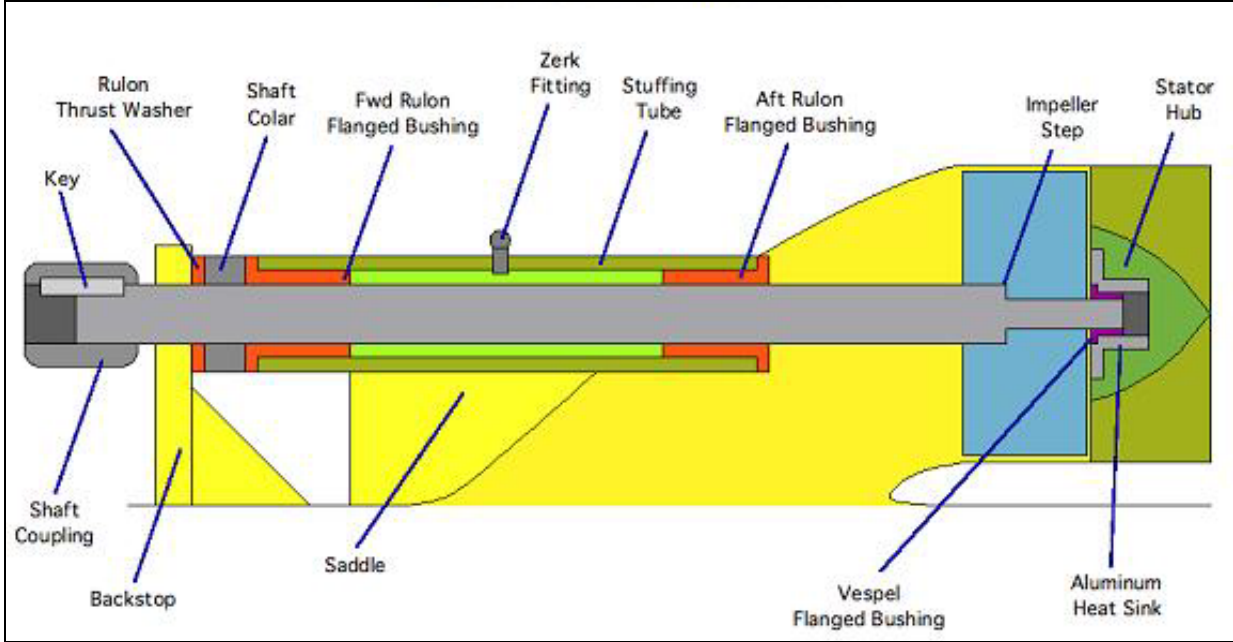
General Arrangement of the Model Waterjet Pump Assembly
